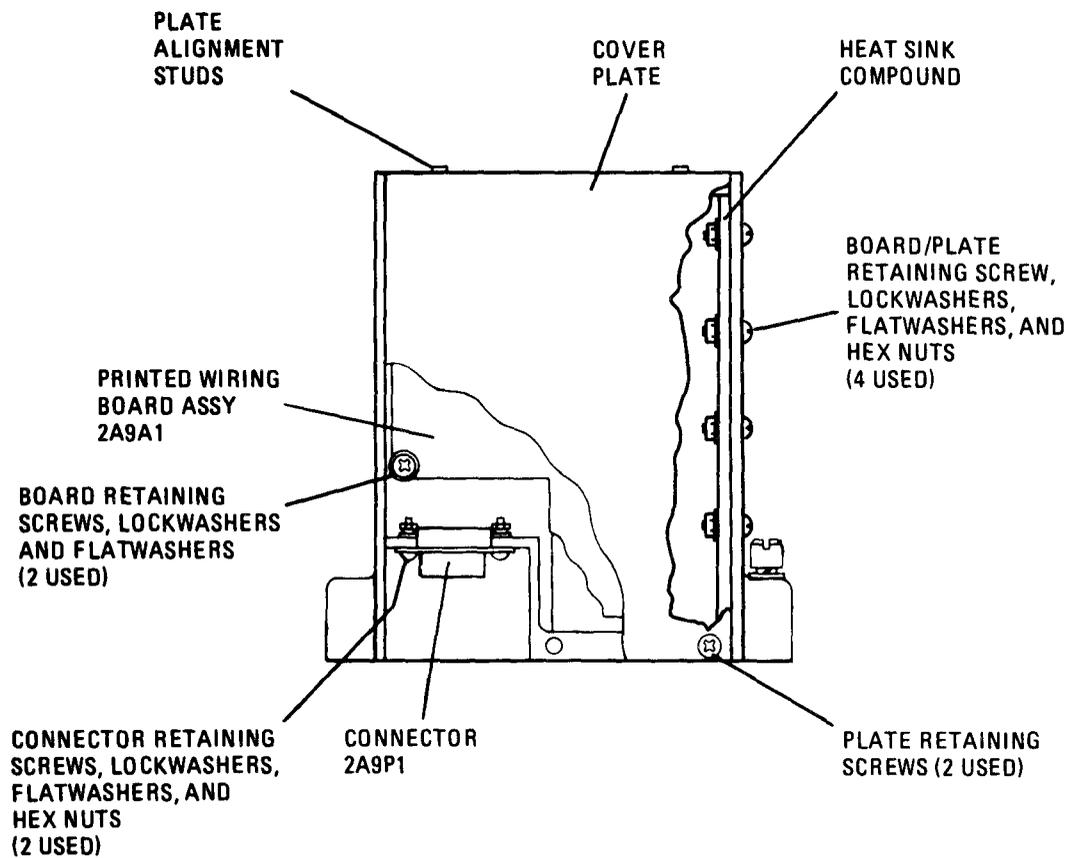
Static Inverter Power Assembly 2A9 - Disassembly Details
